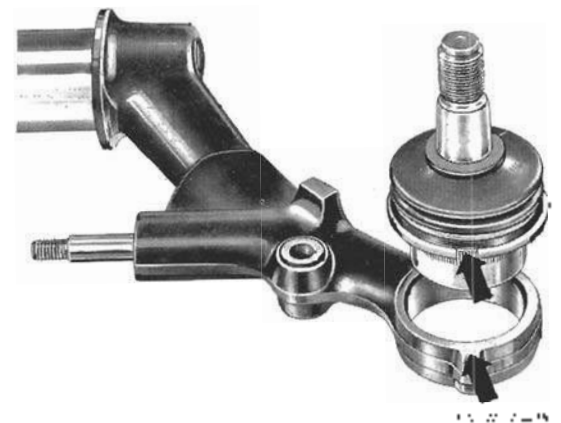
Groove in ball joint lined up with boss on the torsion arm. When you install the ball joint, align the groove with the boss on the torsion arm (bottom arrow).
